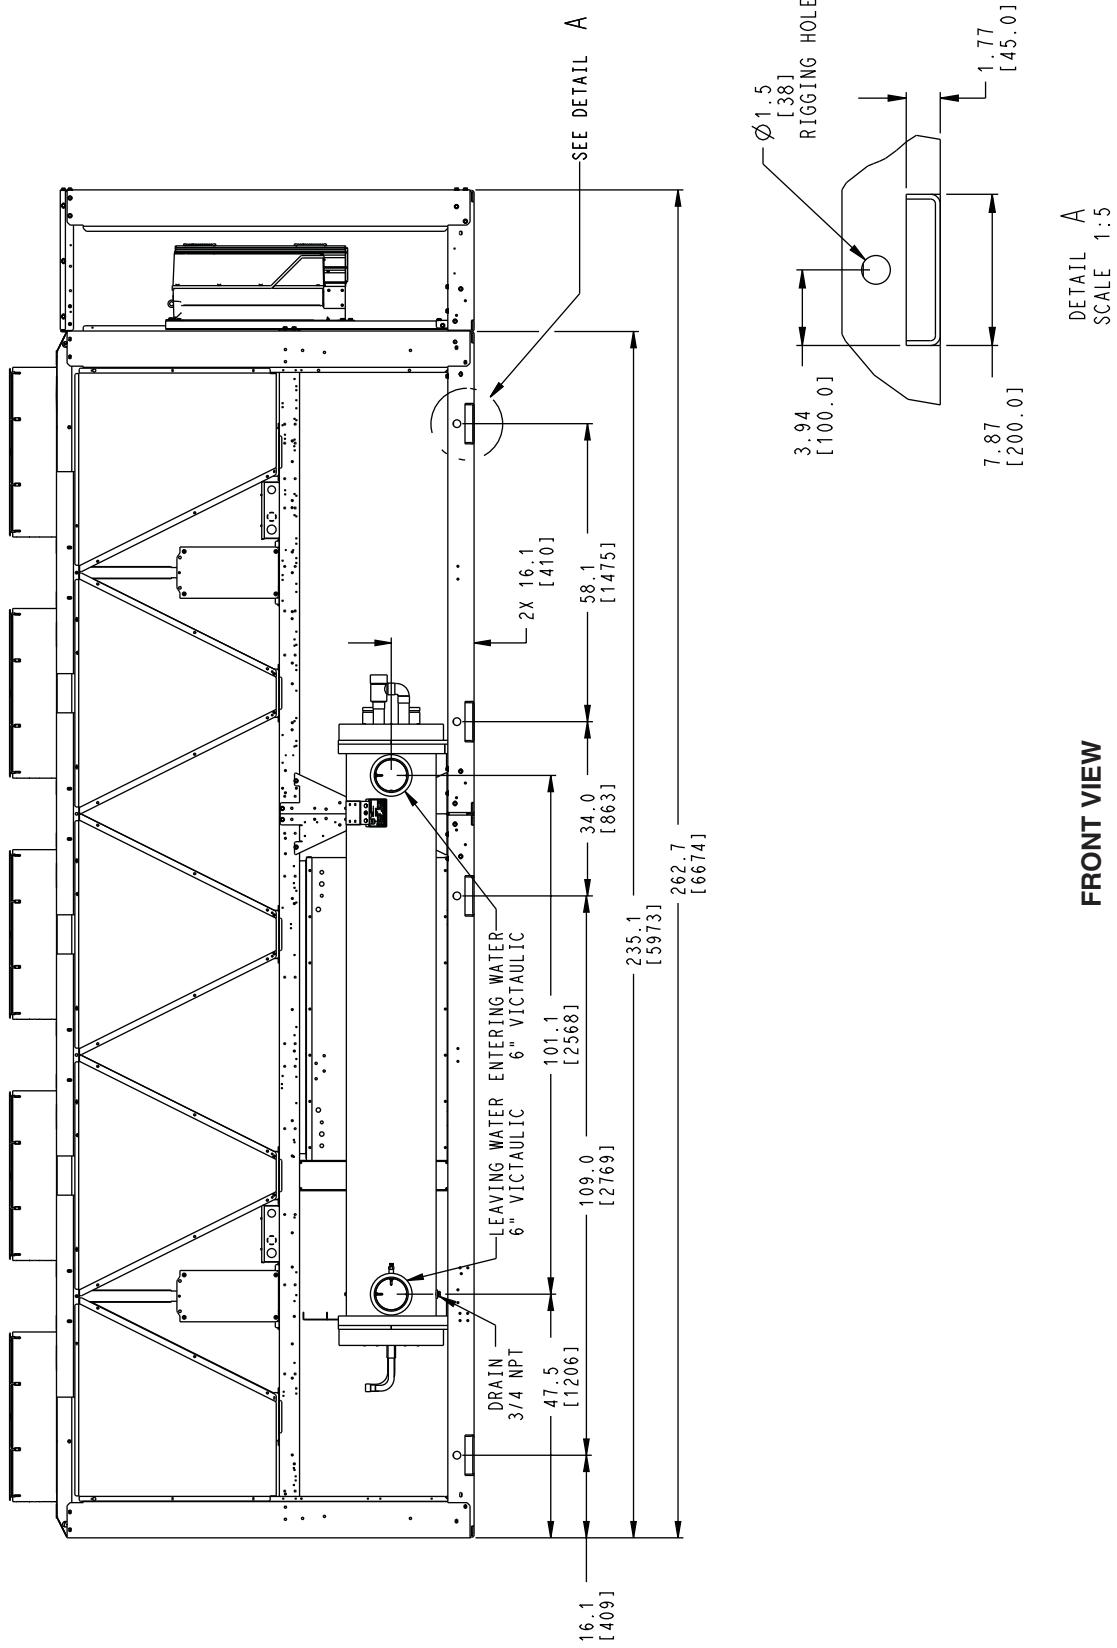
30XA142,162 Air-Cooled Liquid Chiller Dimensions (DX Chiller) (cont)
